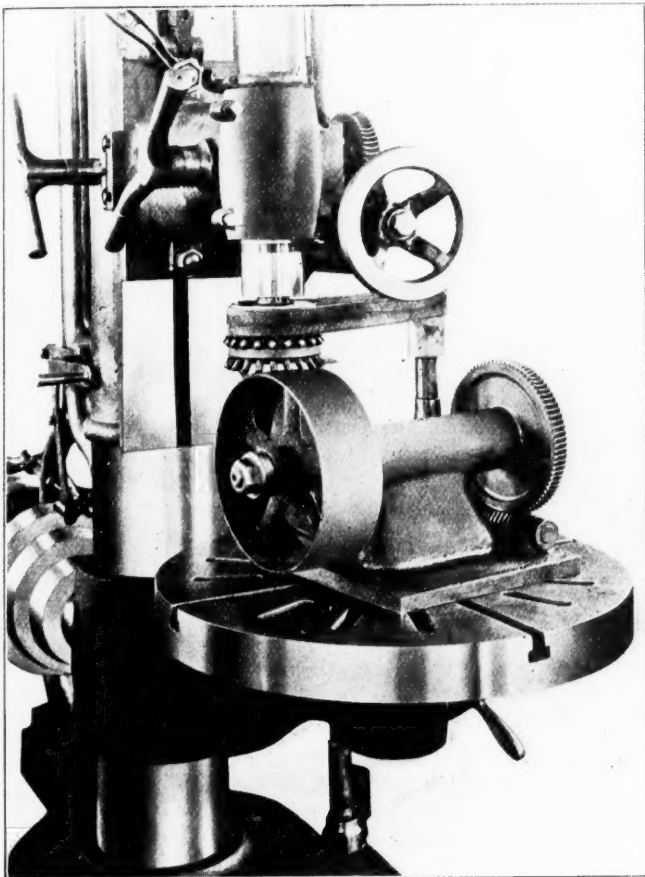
Milling Crowned Pulley Faces on a Drill Press.
